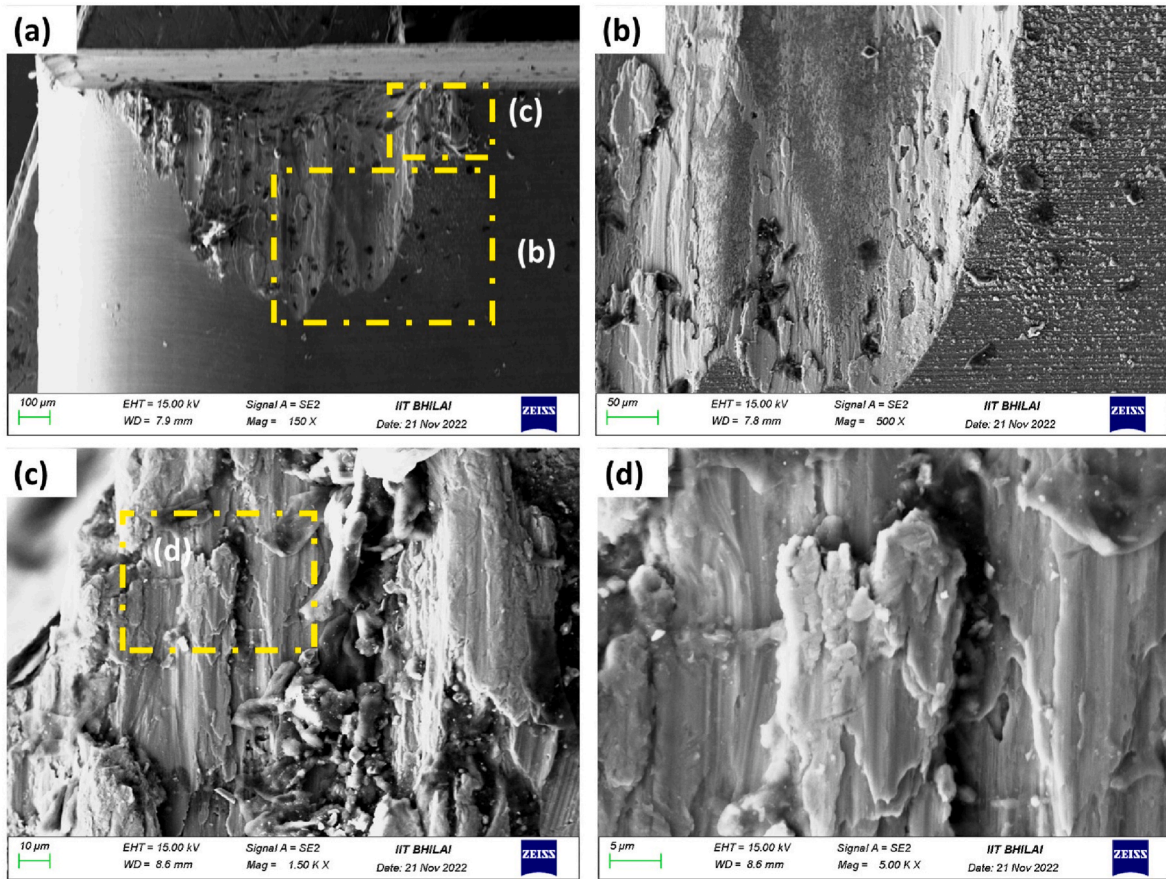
SEM micrographs of the flank surface after machining with uncoated cutting tool at 75 m/min cutting speed.
